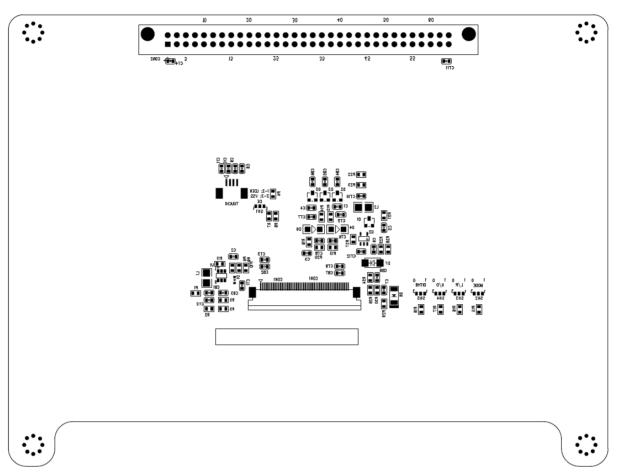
NuMaker-TFT-LCD7 Back PCB Placement
